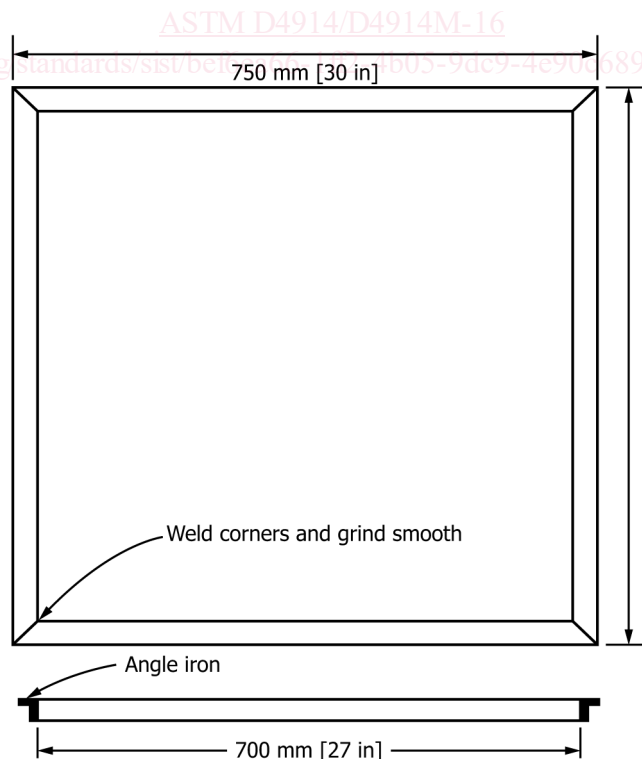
Typical Metal Template for Excavating Test Pit (Dimensions in Inches)
